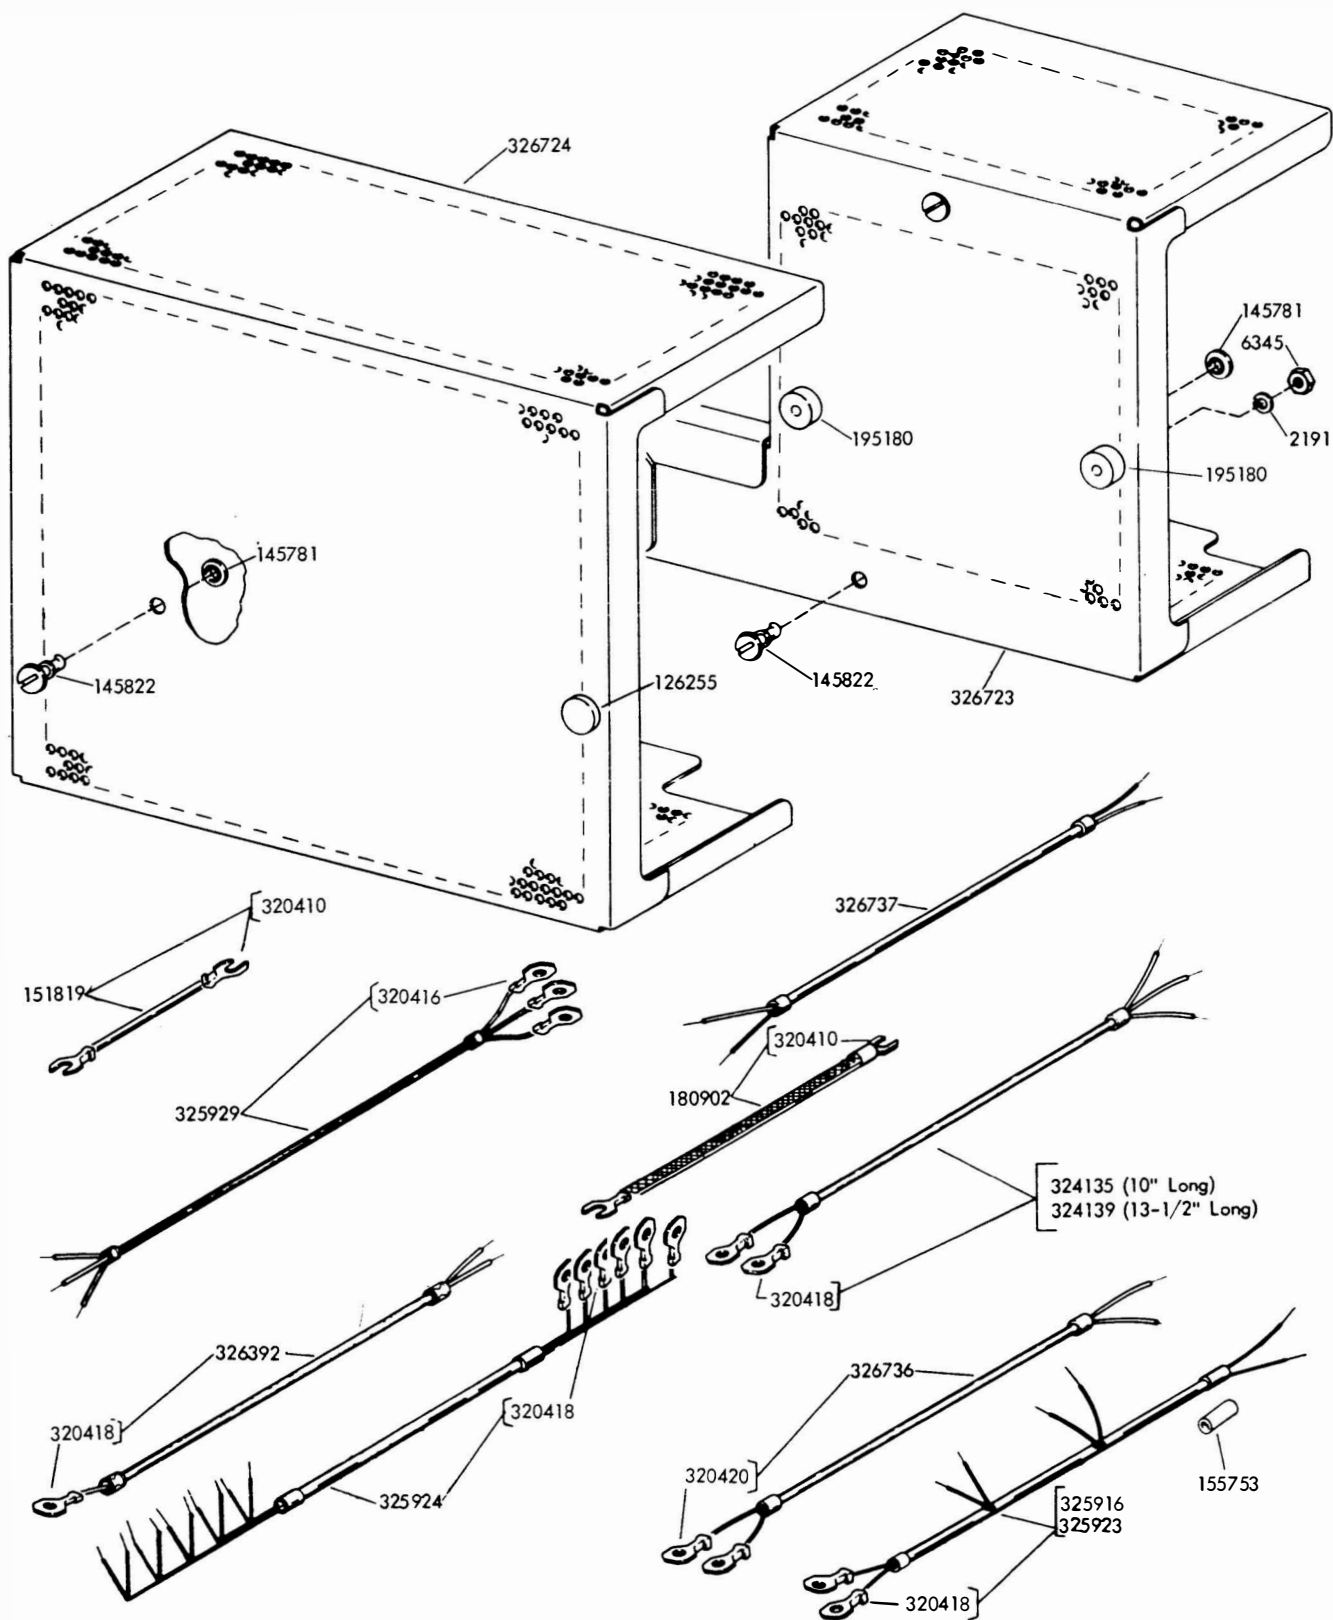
325919 CONTAINER ASSEMBLY (Part of 324060,324061 and 325918 Electrical Service Assemblies)
